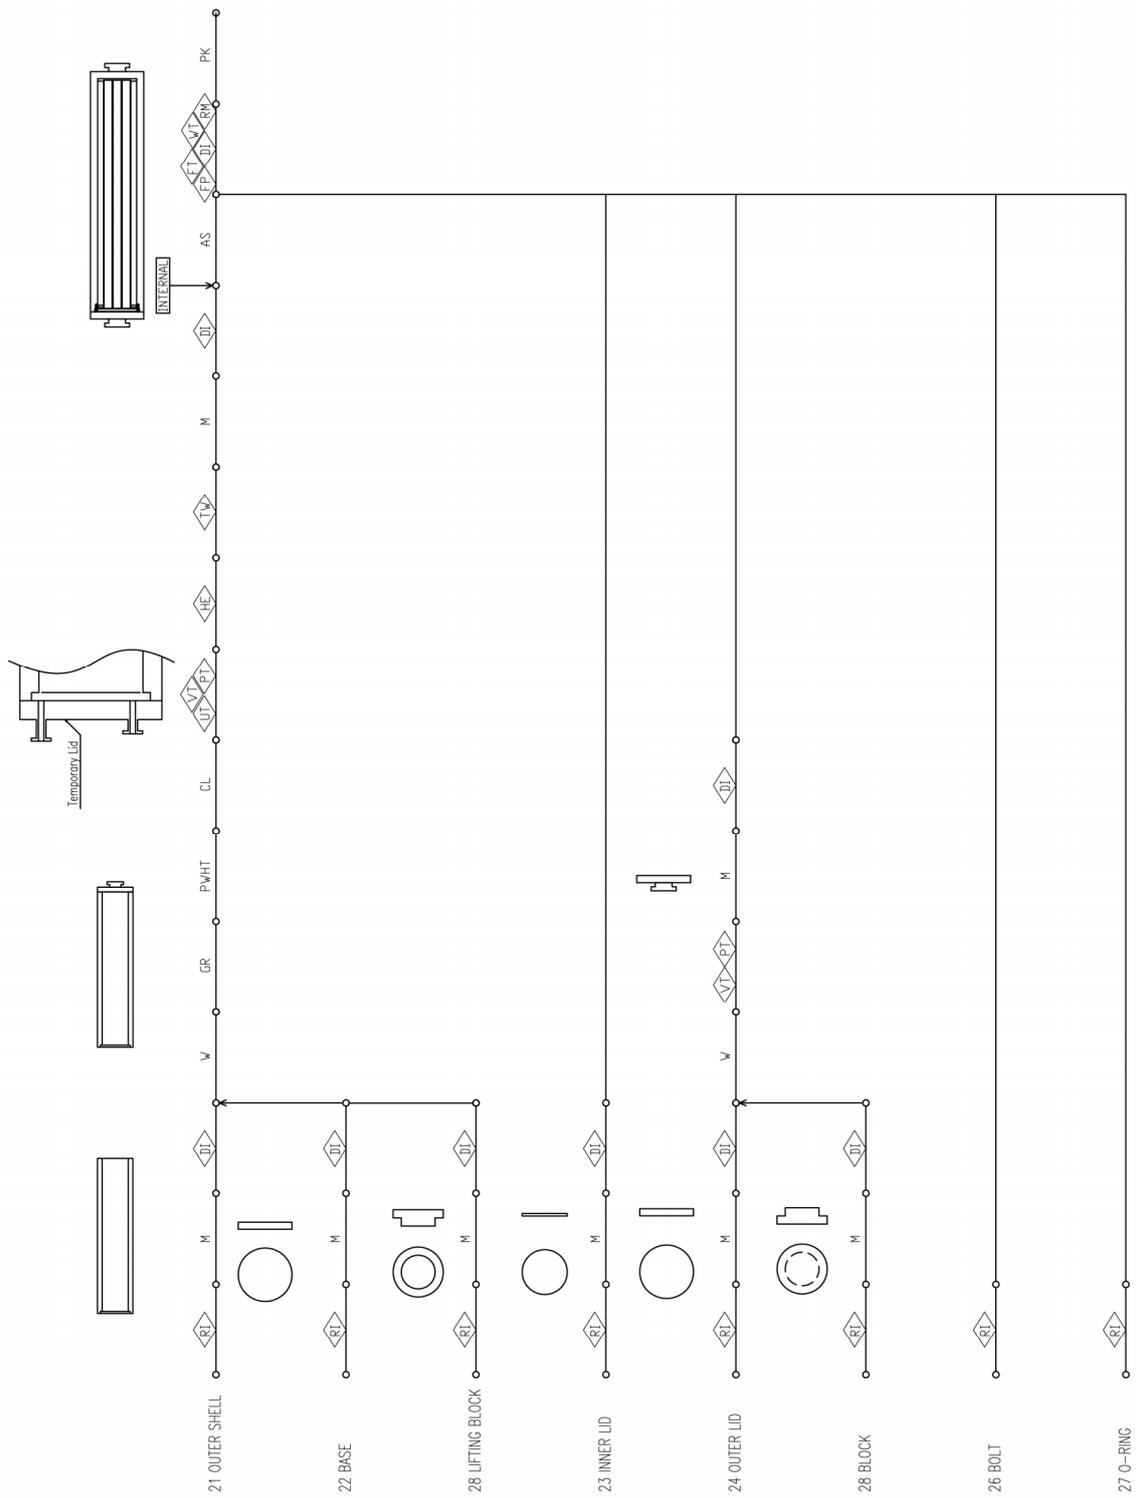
Preliminary manufacturing sequence diagram for canister with a welded base.
